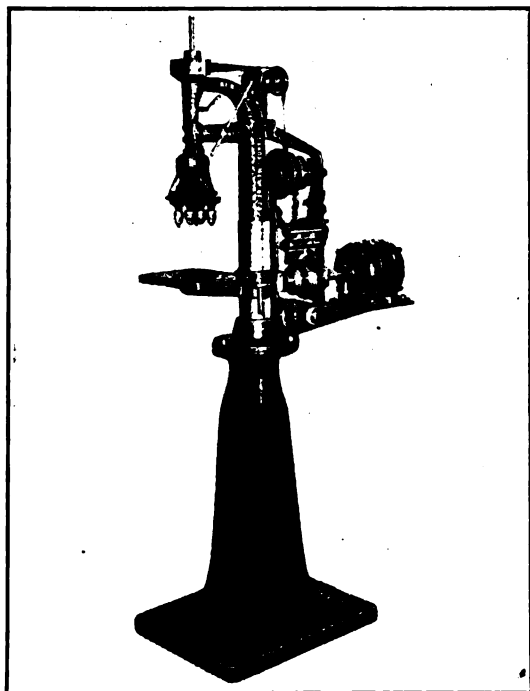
LANDAU DRILLING AND TAPPING MACHINE
